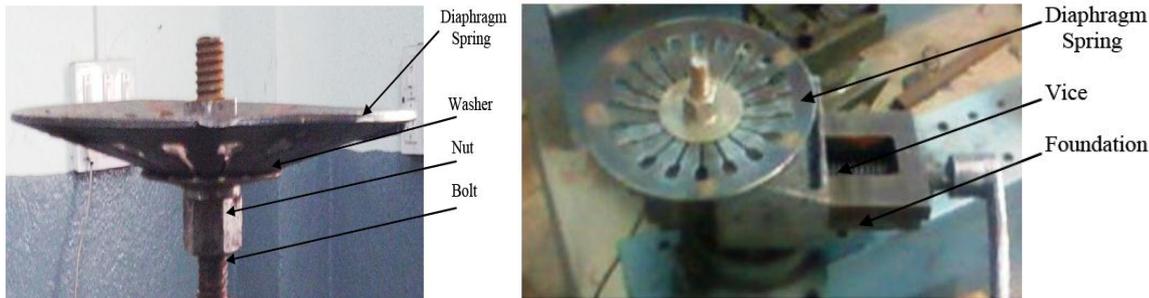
Clamping Details of Test (Front View) Fig. 3 Clamping Details of Test Specimen (Top View)
